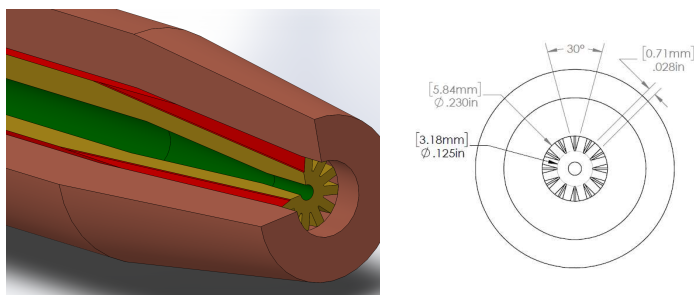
A model and dimensioned drawing of the torch tip used in these experiments.
